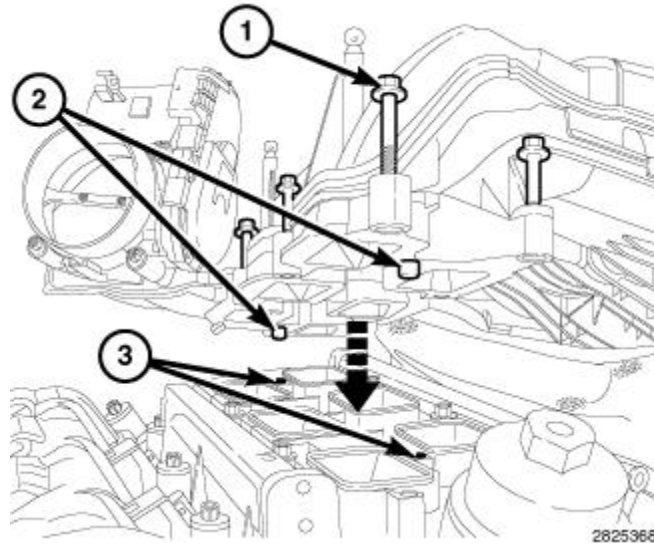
Upper Intake Attaching Bolts, Locating Posts & Holes
